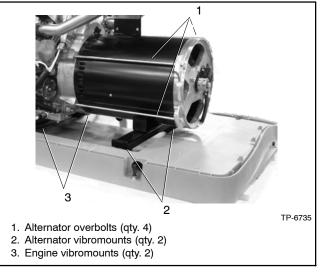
Vibromounts and Overbolts (RESA shown)
